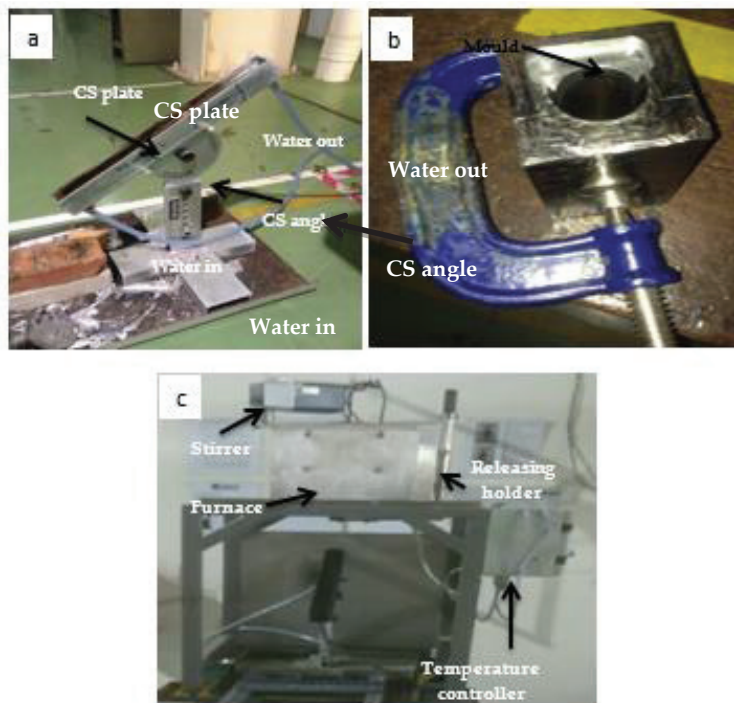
Cooling slope casting apparatus; (a)Cooling slope (CS), (b)Stainless steel mould, (c)Furnace.
